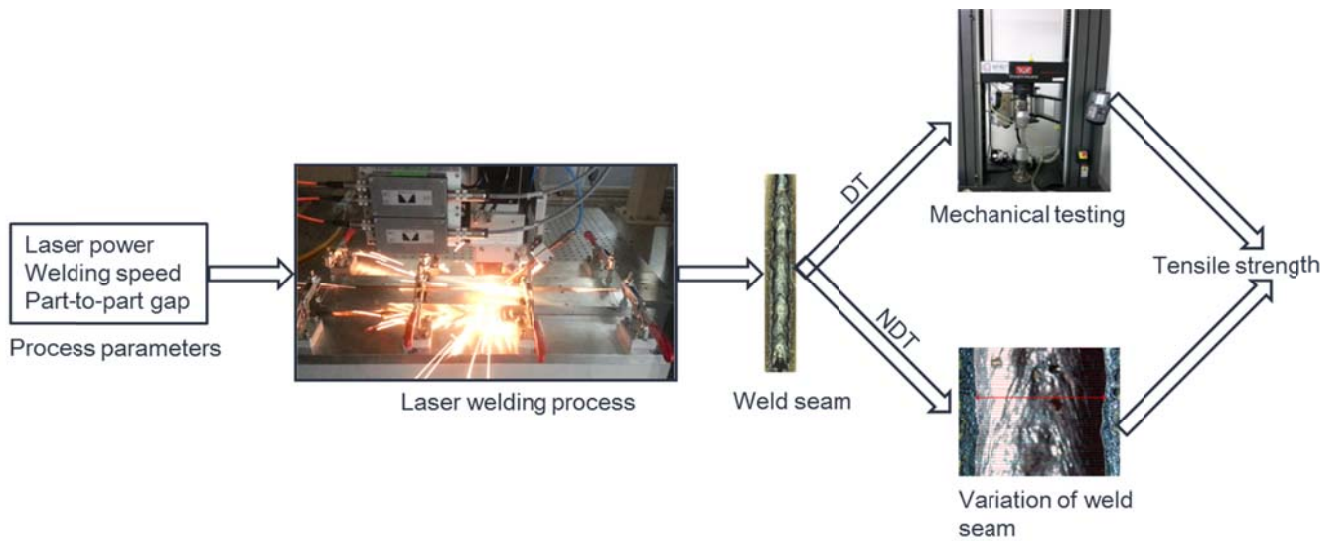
Schematic diagram of laser welding system for estimating tensile strength of the weld seam (DT: Destructive testing; NDT: Non-destructive testing)
